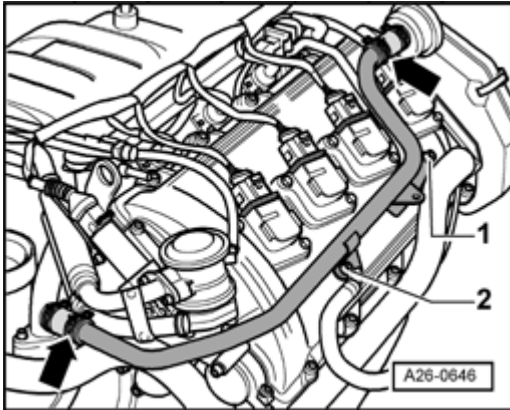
Removing Bolts & Pipe Of Crankshaft Housing Ventilation
